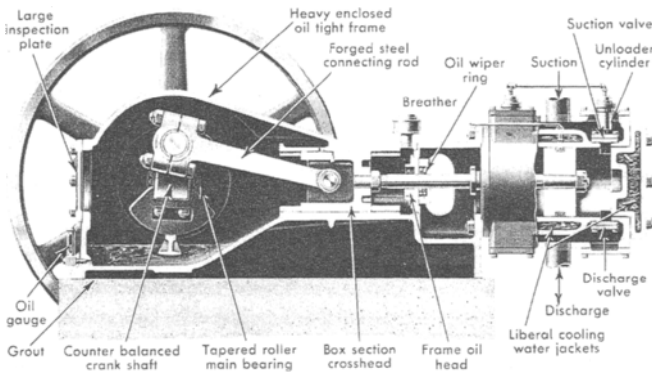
A. Sectional assembly, Worthington single-stage, belt-driven air compressor showing construction of air cylinder and running gear. (Used by permission: Bul. L-600-B9. Dresser-Rand Company.)
